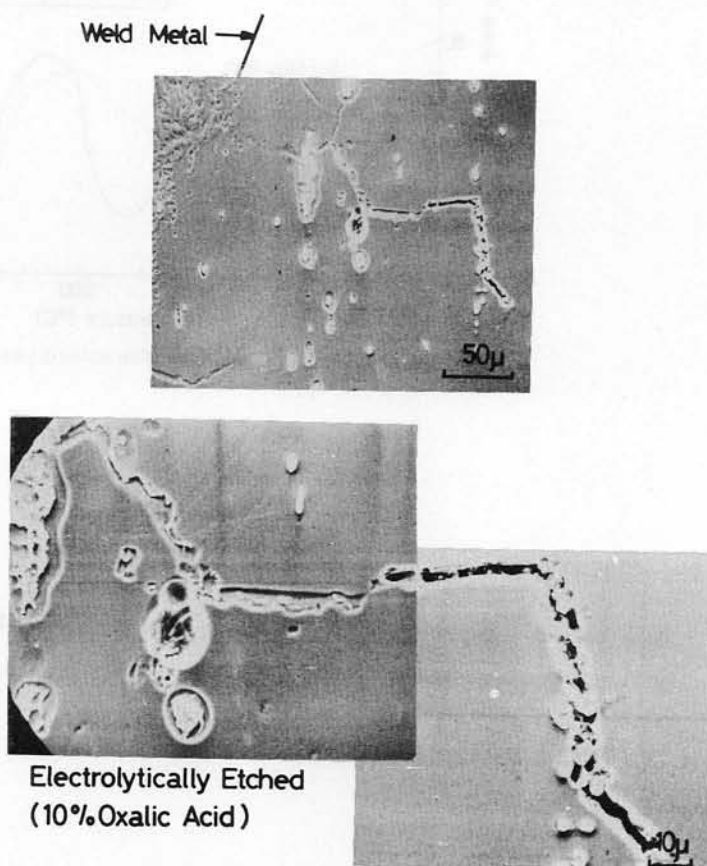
Nailhead Crack in Electron Beam Welds
